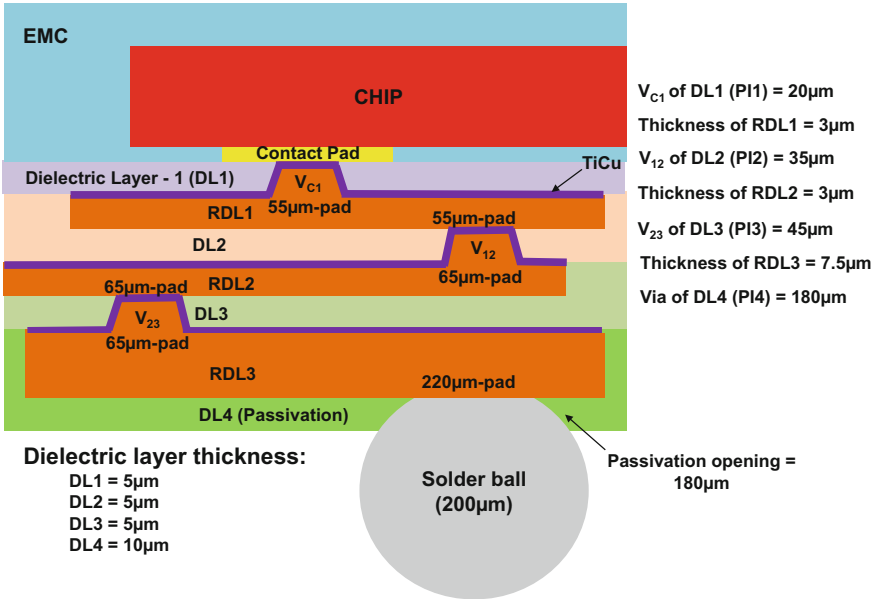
Schematic of the cross section of the test package with UBM-less Cu pad solder ball attachment
